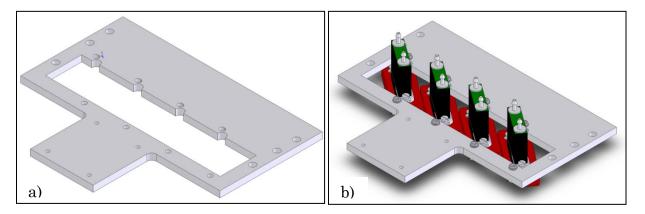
Multi-unit bottom plate (a. without printheads; b. with printheads)
